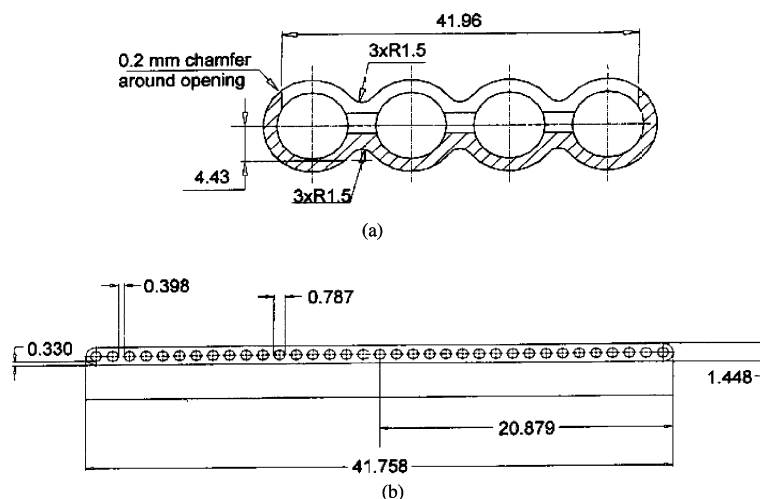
Cross-section of the header pipe and microchannel tube of a prototype CO₂ evaporator for a car air-conditioning system [76]. (a) Cross-section of header pipe, (b) flat microchannel tube.
